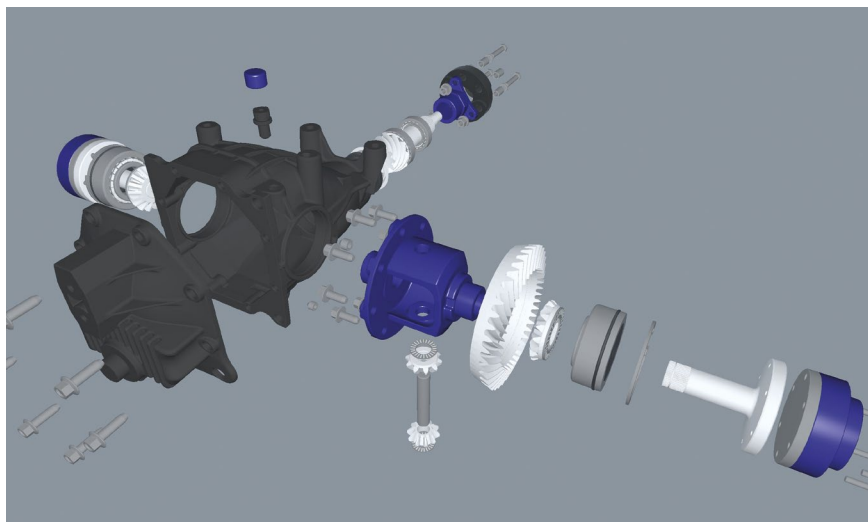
Exploded view of the individual parts of a differential gearbox (© FH SWF)
